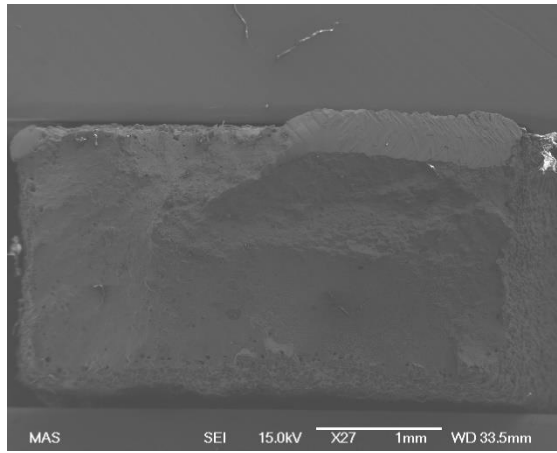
90 B8 HT1 x27 Fracture Surface, UTS 576 MPa
